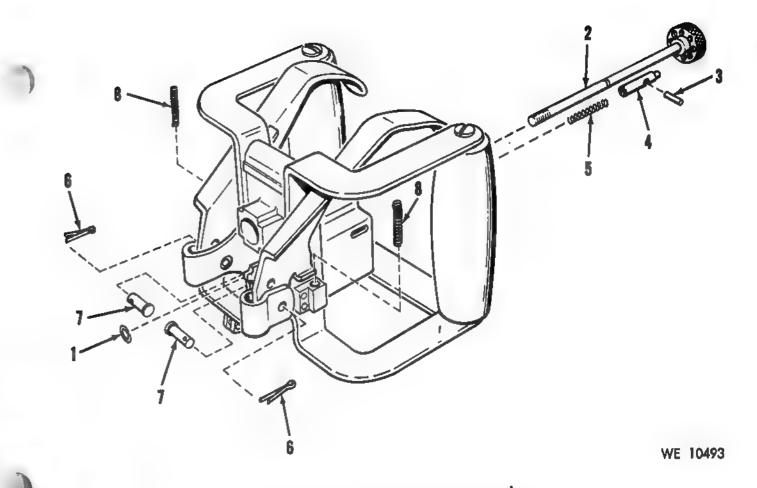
Grip and trigger Assembly-Partially Exploded View.
